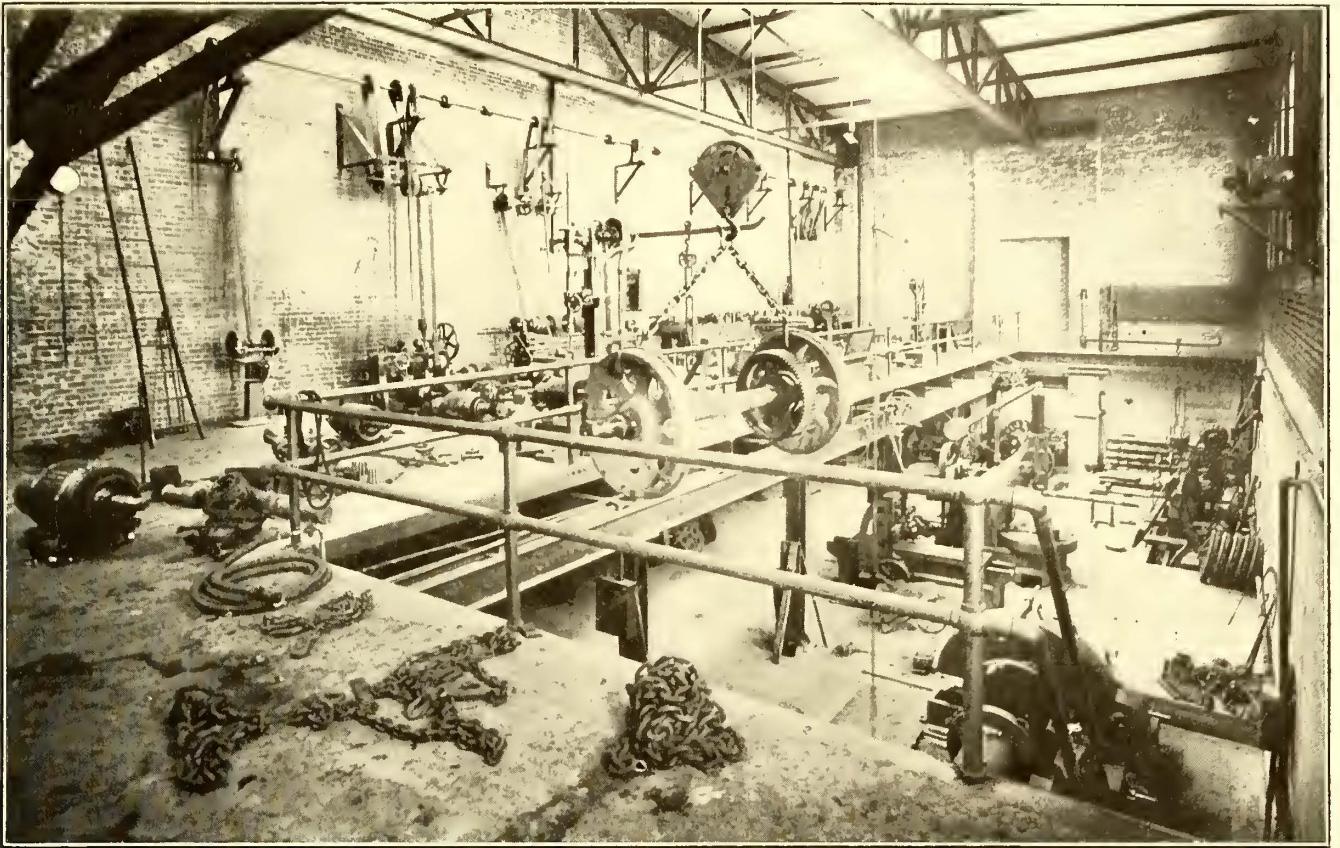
Syracuse Shops—General View of Machine Shop and of Jib Crane Delivering a Wheel Set to Heavy Tool Department
